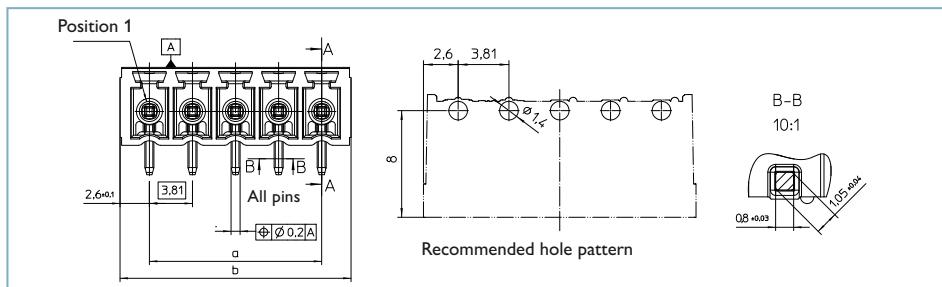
Layout and tolerance drawing of a typical THR component
